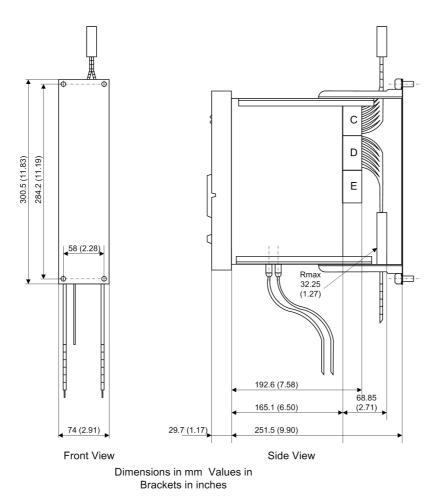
Dimensional drawing of a 7RW80 for panel flush mounting (housing size 1/6)
